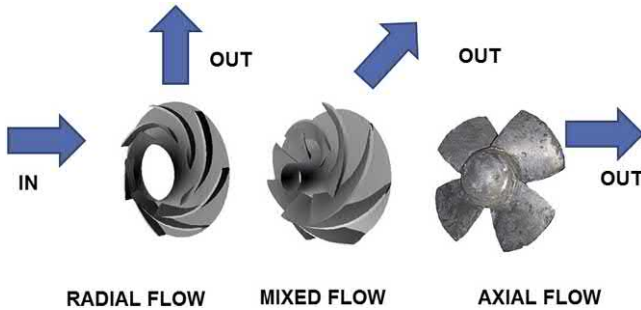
The general appearance of rotodynamic pump impellers.
